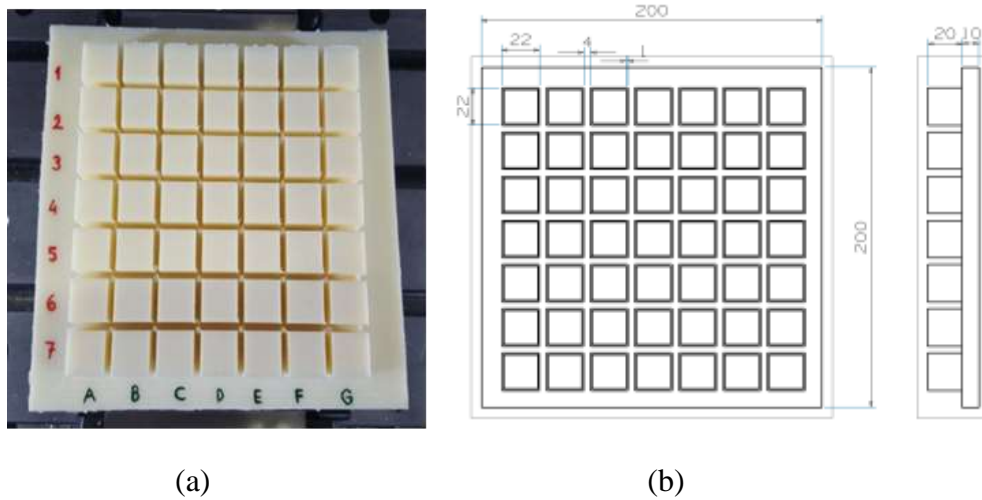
(a) Optical image of the test specimen, (b) Test specimen dimensions.
